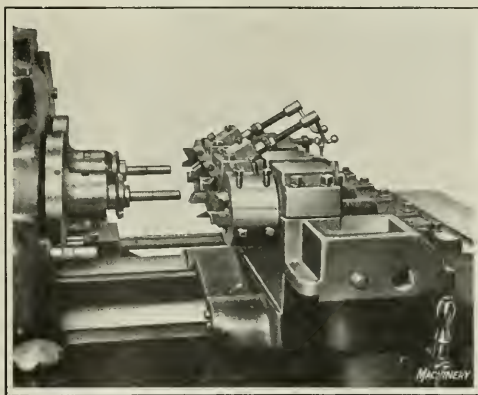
Equipment for machining Differential Gears. Similar to that shown in Fig. 10 except that Hand-operated Recessing Tools are used
